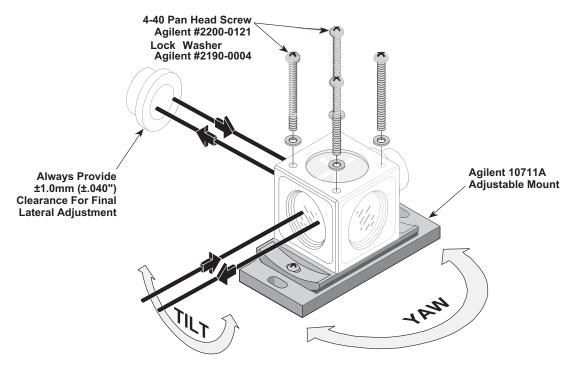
Horizontal plane mounting using the Agilent 10711A adjustable mount
